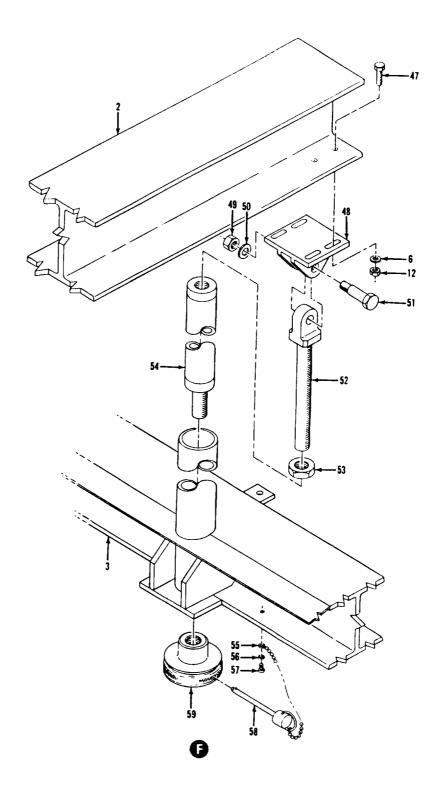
Extension Platform Assembly (Sheet 5 of 13)
